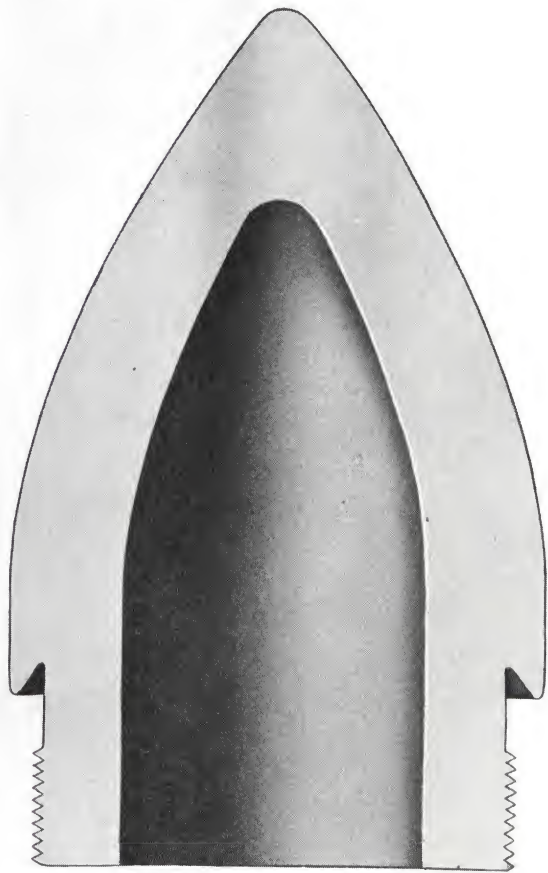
2.25-Inch Rocket Head Mk 3 Mod 3 (PRAC, SC), Cross Section.
